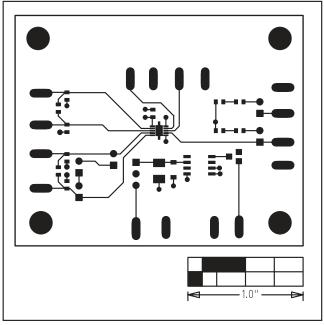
MAX6603 EV Kit PC Board Layout—Component Side
